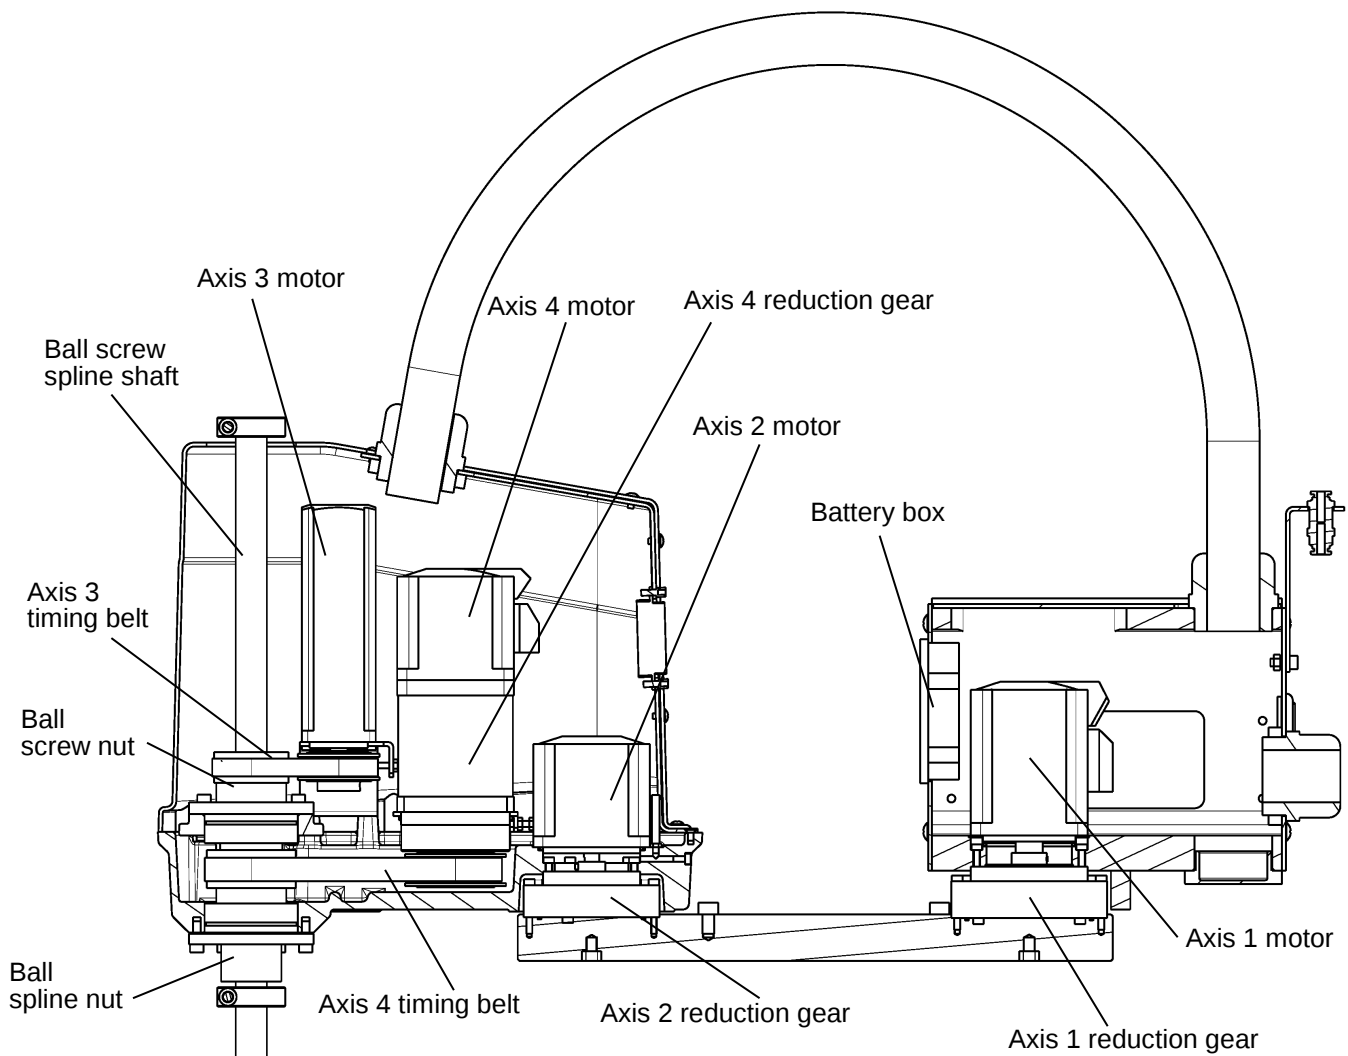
Layout of robot mechanical components (KHL-400-T)
